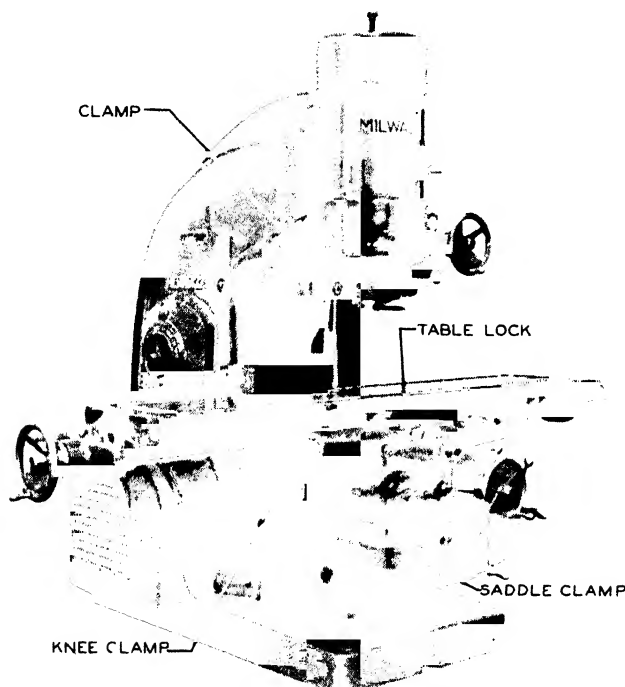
Typical Vertical Milling Machine with Built-in Flywheel
